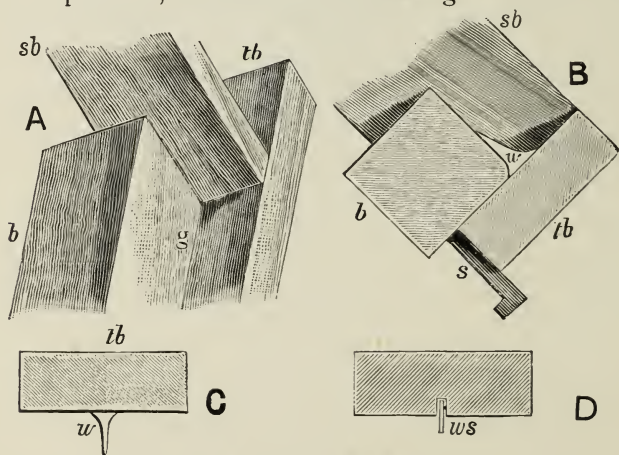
SIMPLE GUIDE MAKER (Full size).
